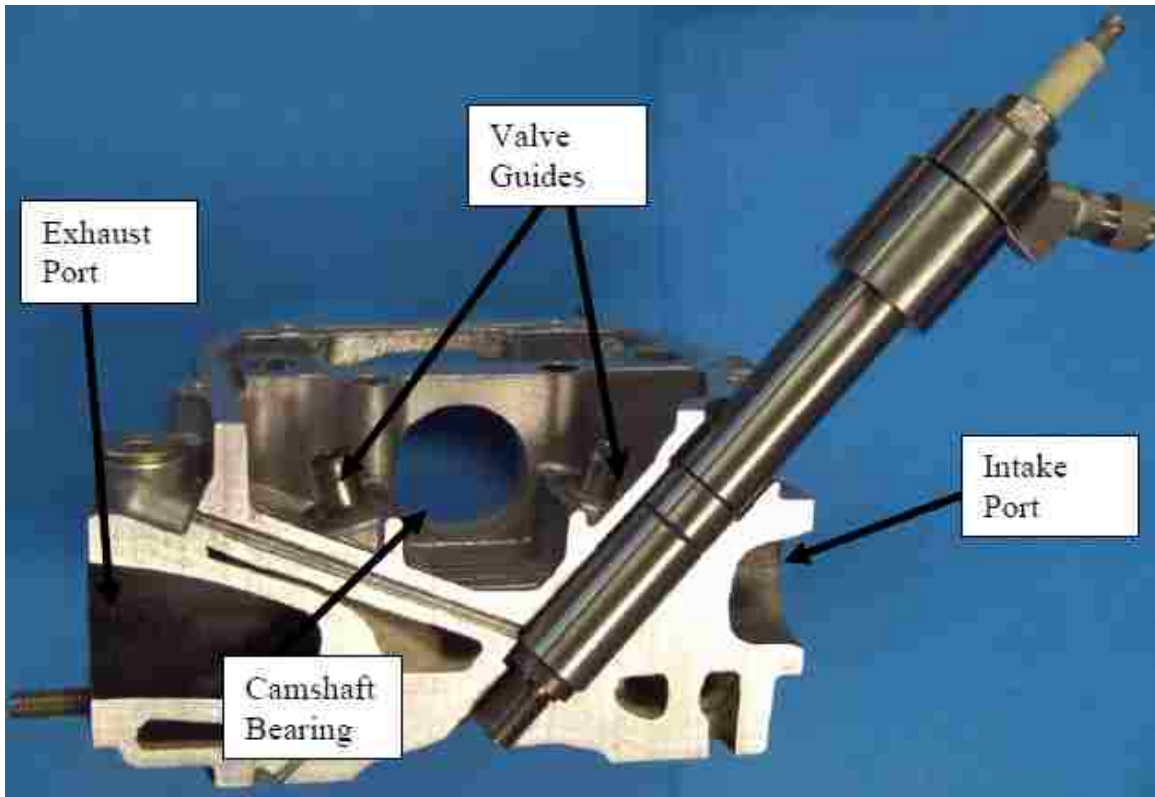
Polaris cylinder head cutaway displaying hydrogen direct injection spark plug/injector assembly. Figure courtesy of R. Fifield [6].
